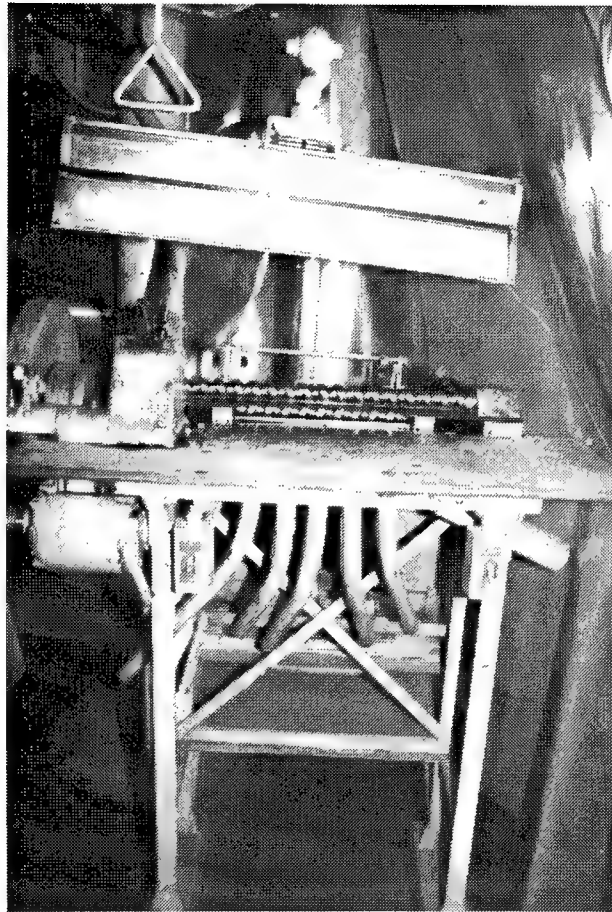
Building 3: Visual Inspection Machine manufactured by Peter's Engineering Co.
